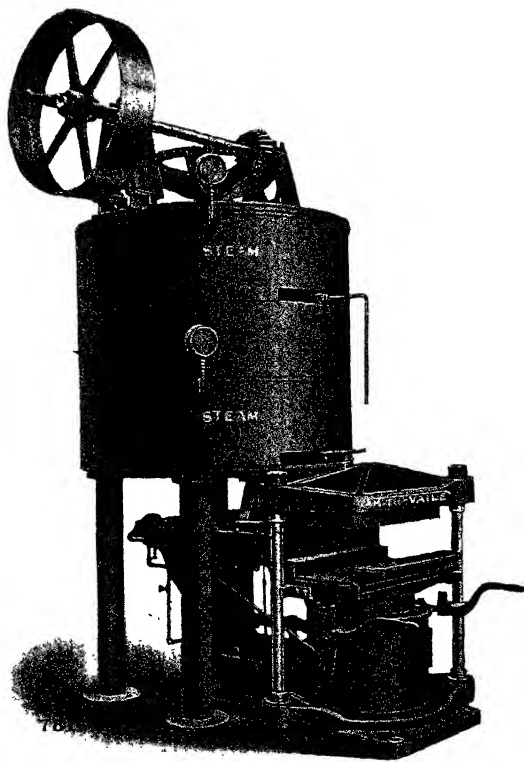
PLATT HEATER AND STEAM FORMER.
